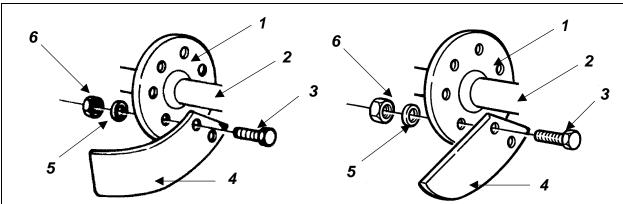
The drawing on the left shows the tilling rotor while that on the right shows the straight blade aerating rotor.
